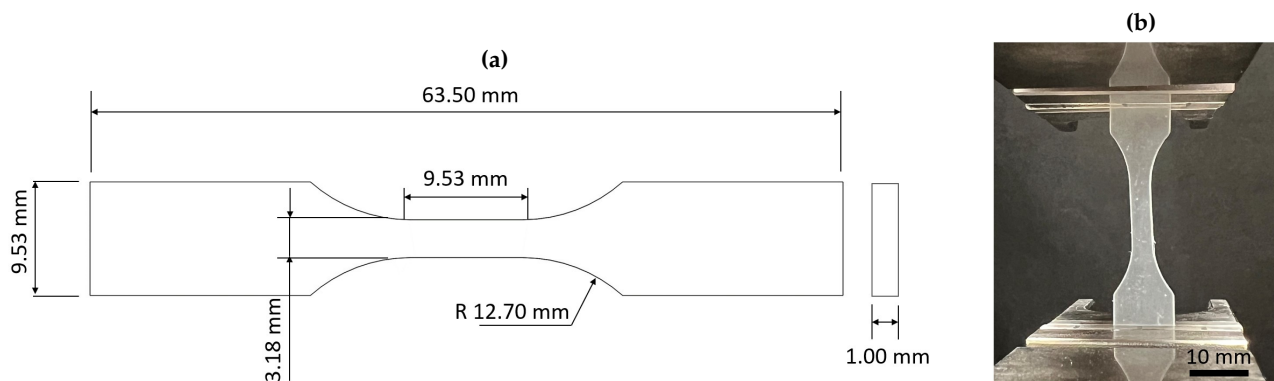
(a) Schematic drawing with dimensions of tensile test samples according to ASTM D-683 type V. (b) Image of test set-up used for tensile test.
